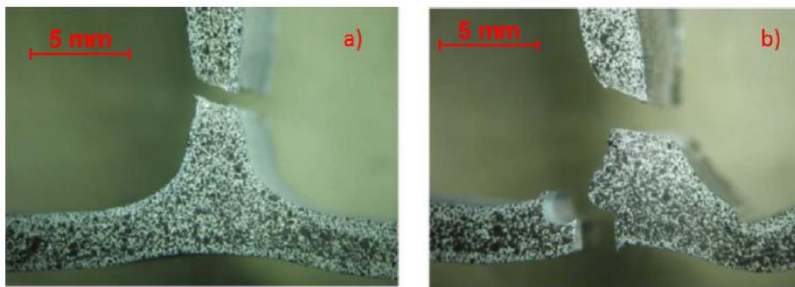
Examples of the fracture zone for the pull out tests. (a): sample BPP6-1 and (b): sample LTT6-3.
